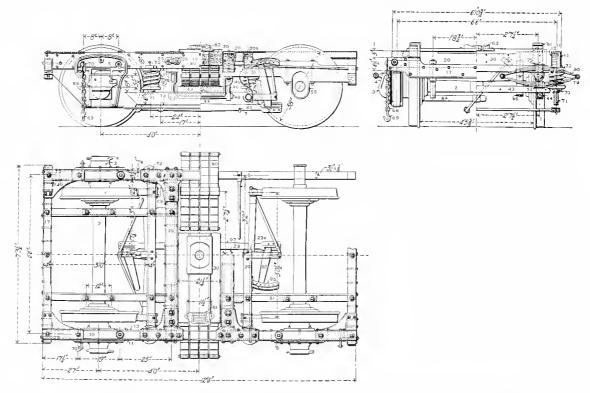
Half End Elevation and Cross-Section. Cast Steel Four-Wheel Passenger Truck. C., C., C. & St. L.
